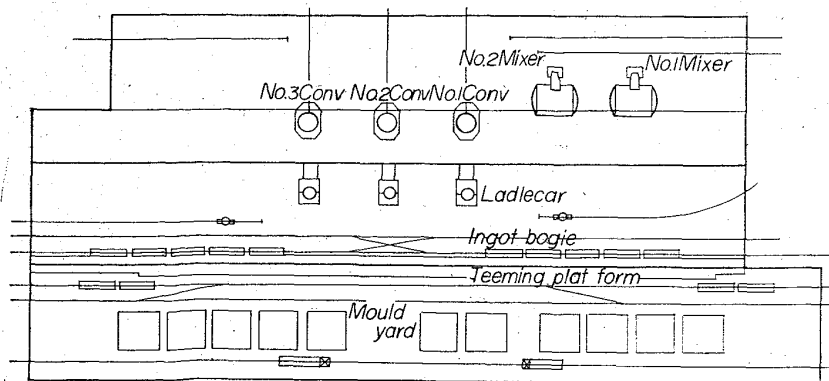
Layout of facilities at Tobata No. 1 L. D. plant.
